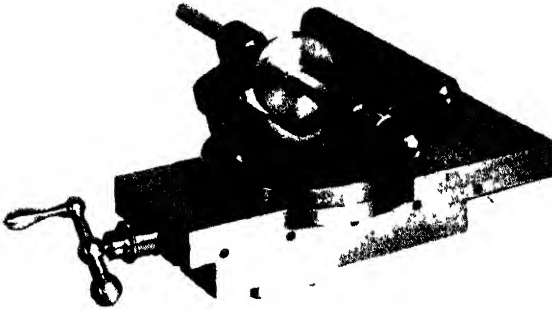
Universally adjustable grinder (Pratt & Whitney)
